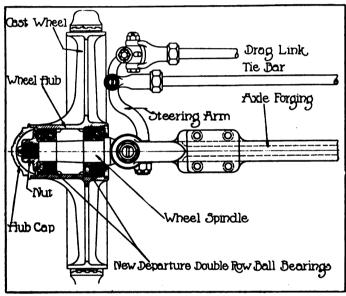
Front Wheel Assembly of Heavy Electric Truck Axle Showing Double Row Ball Bearings.
